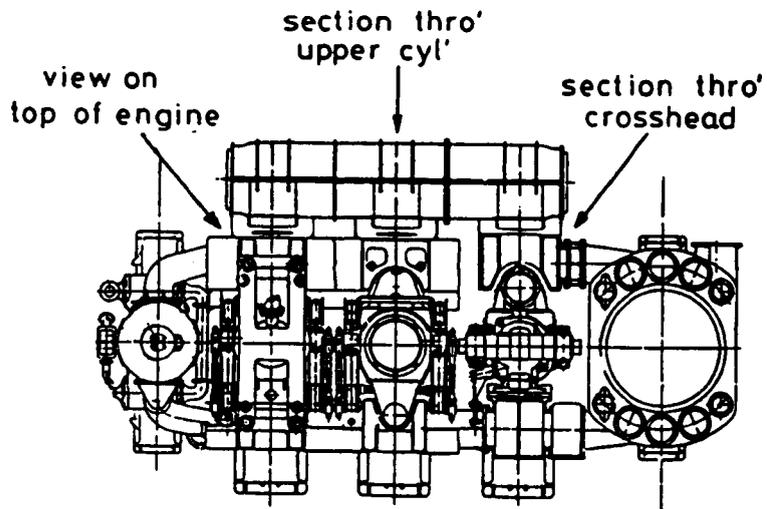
b.8 Plan View of NBDEW Sliding Cylinder Engine
